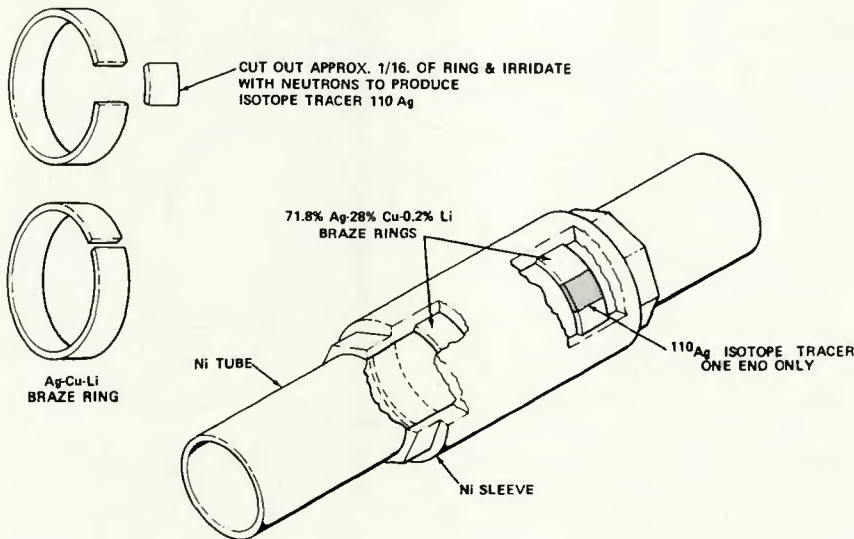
Cross-section of tube and sleeve assembly in brazing container
